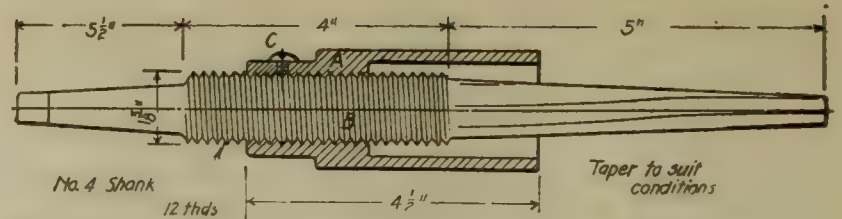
Reamer for Crown Bolt Holes, Etc.
